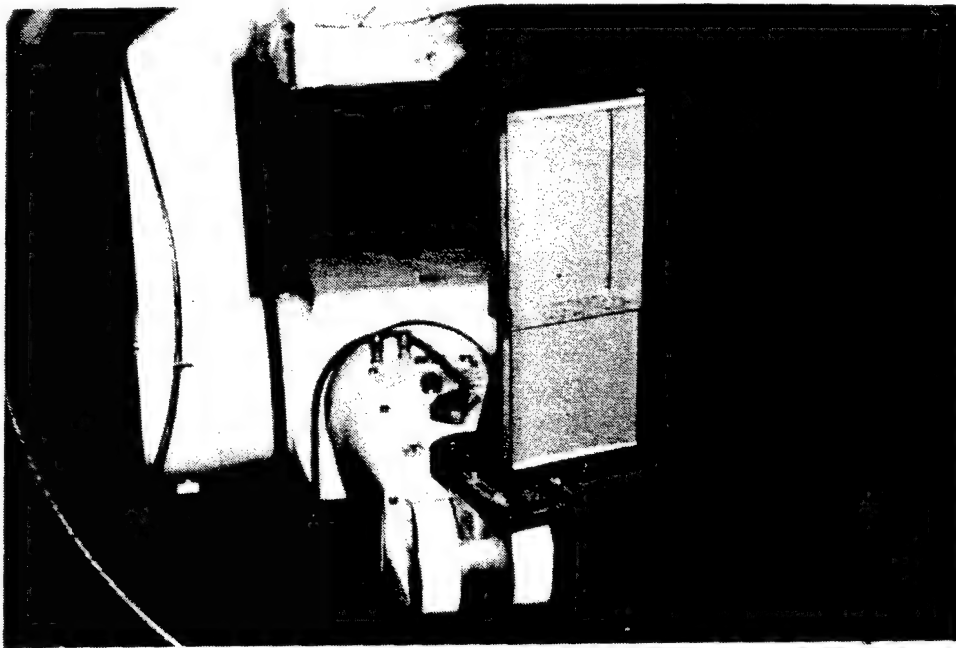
Wear and corrosion spray fixture mounted on robotic arm.
